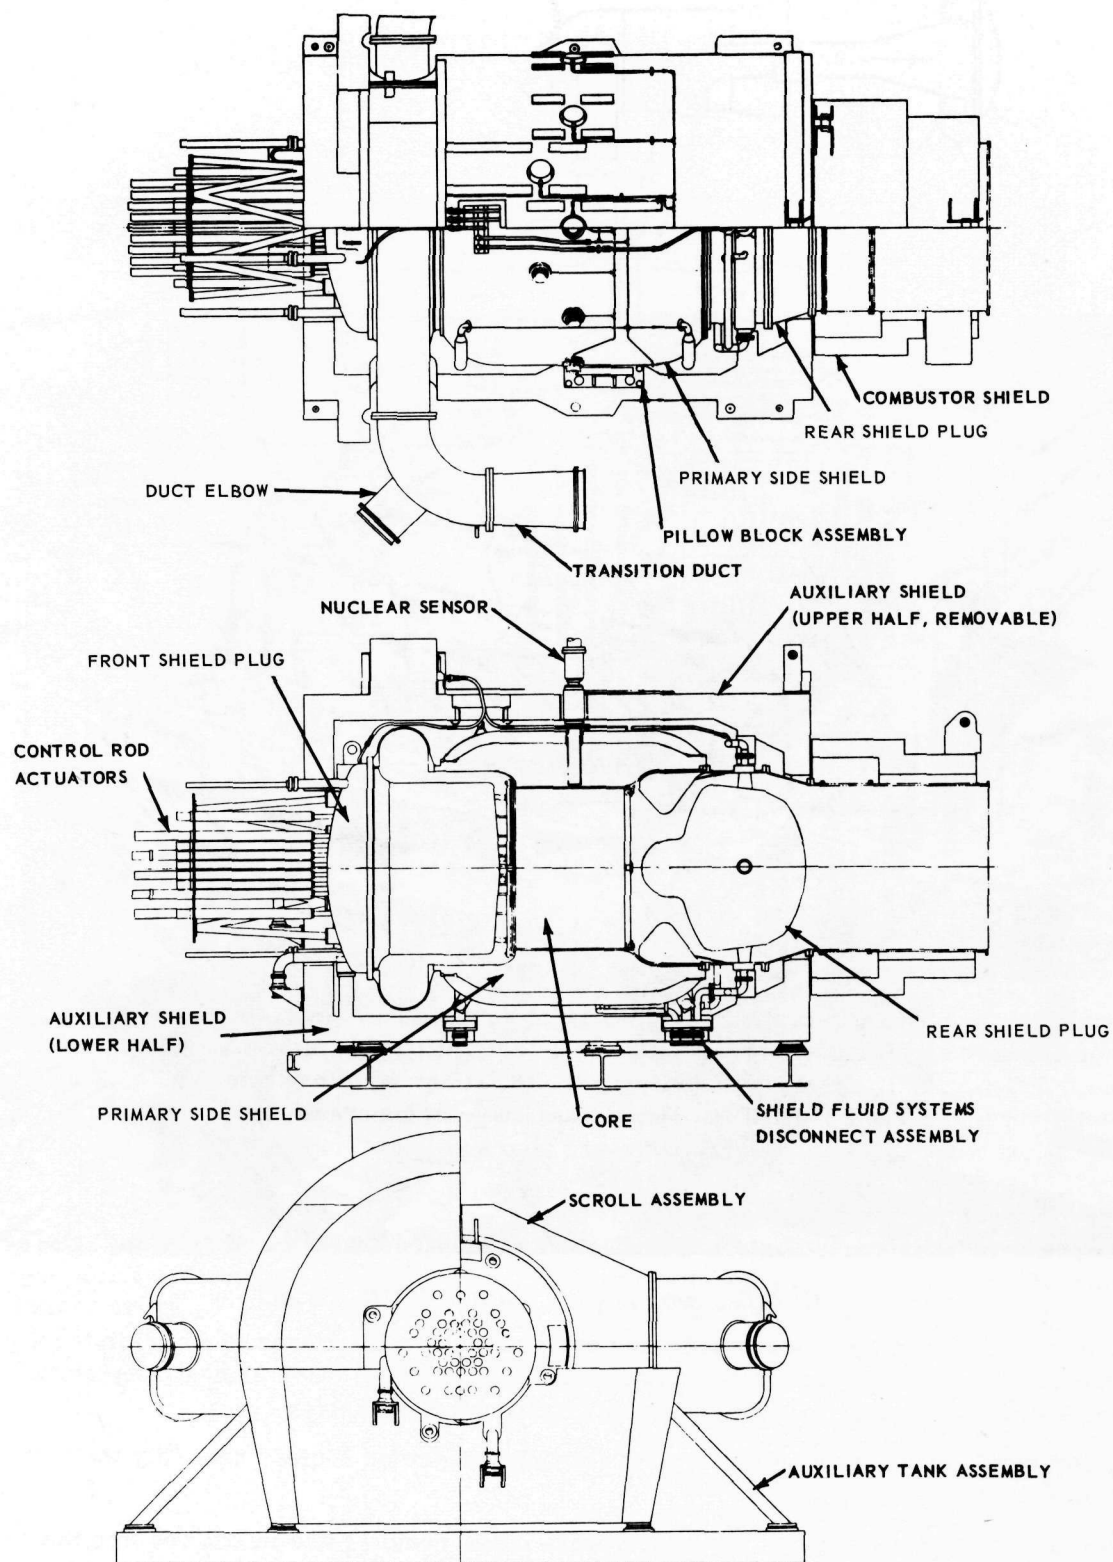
HTRE No. 3 reactor shield assembly (side and section views)
